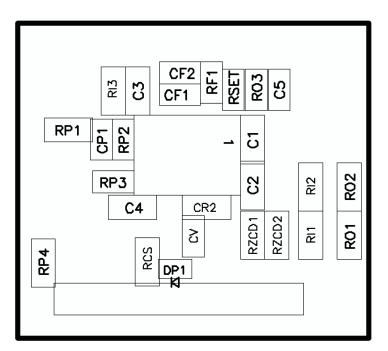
PR735 Controller Board Parts Placement (viewed from top)
